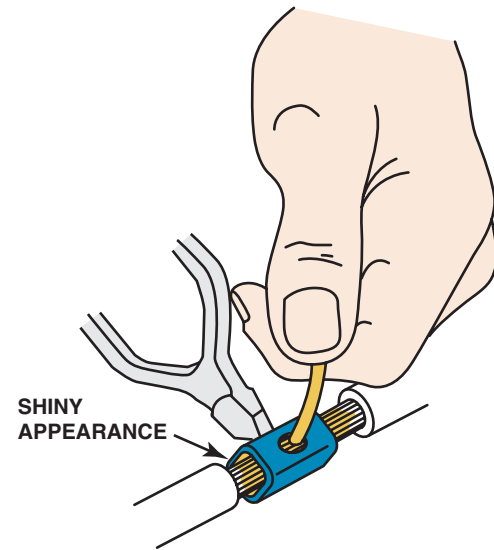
All hand-crimped splices or terminals should be soldered to be assured of a good electrical connection.
